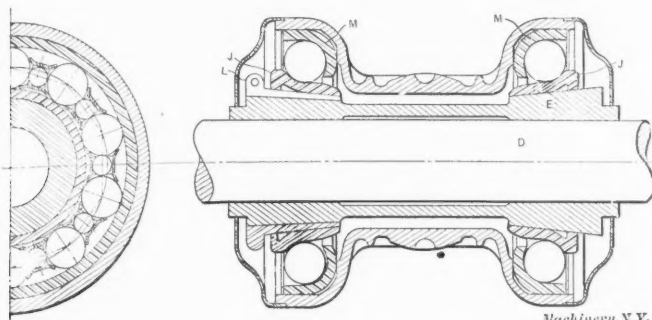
The Chapman Ball Bearing for Shaft Hangers.
